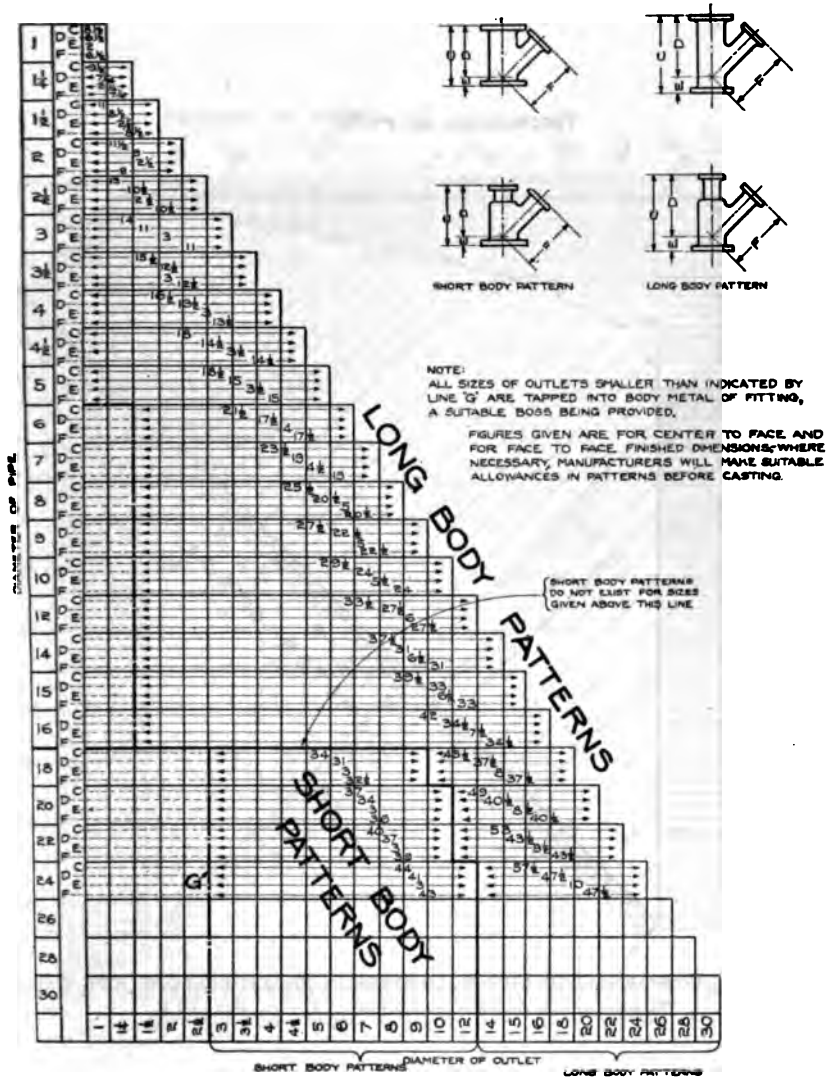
REDUCING LATERALS, LONG AND SHORT BODY PATTERNS, 250-LB. WORKING PRESSURE PER SQ. IN.
